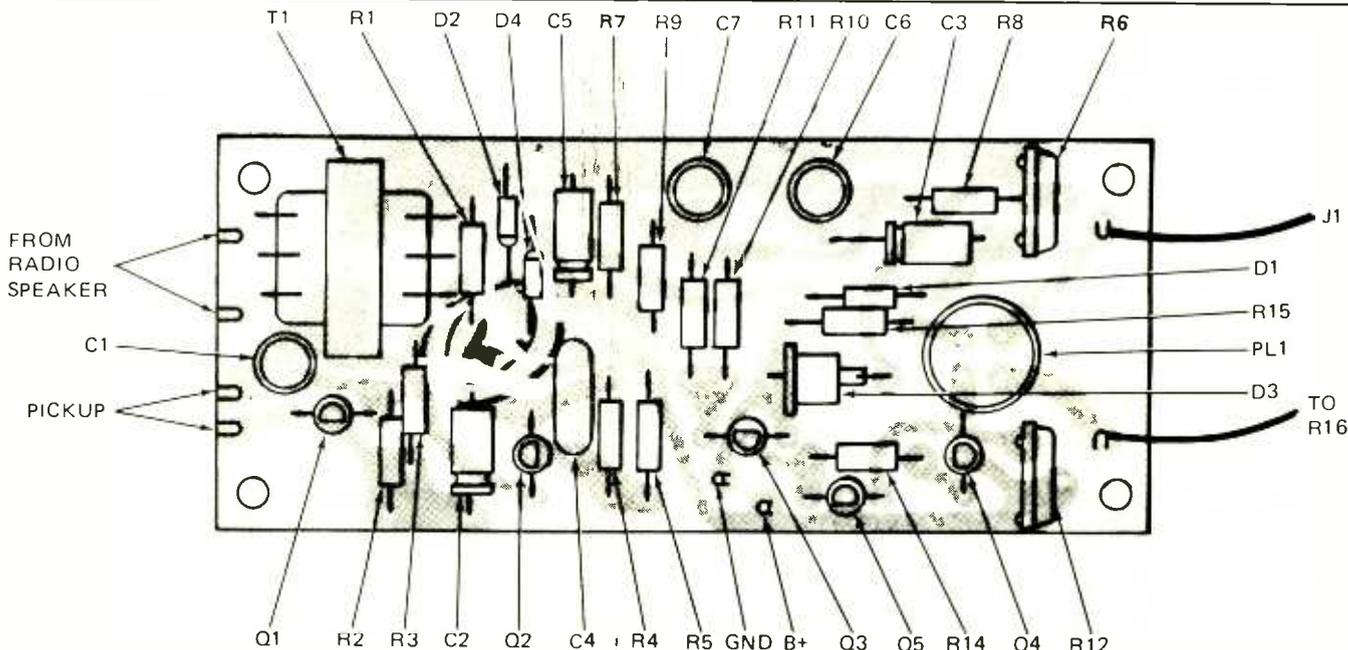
TOP SIDE OF THE PC BOARD. Parts placements is clearly shown.
